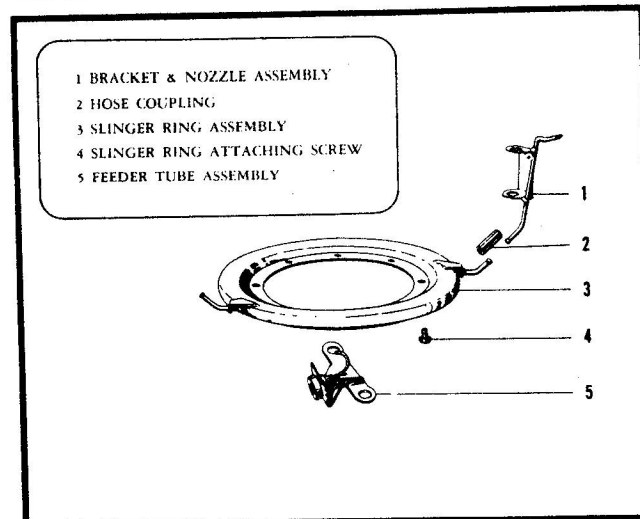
De-Icing Device Assembly for Models 22D30 and 22D40
